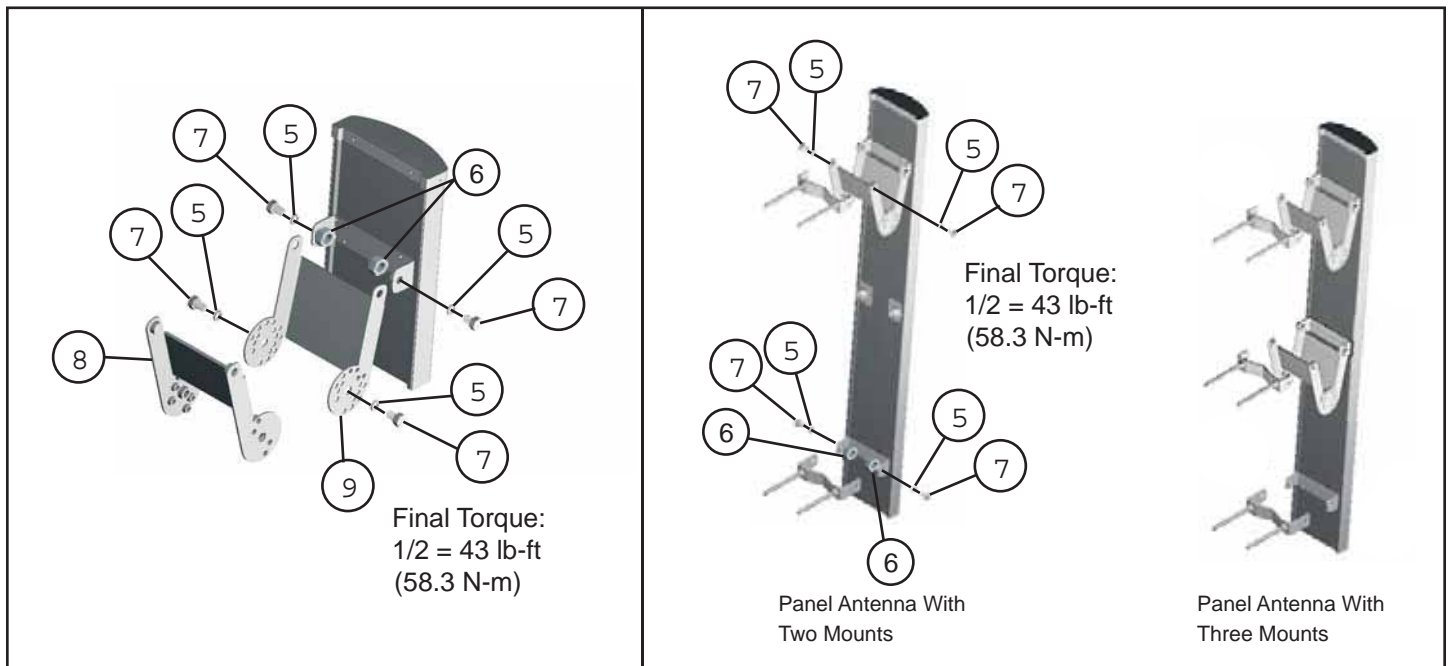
Fastening Downtilt Adapter Bracket to Upper/Middle Antenna Mounting Bracket.
